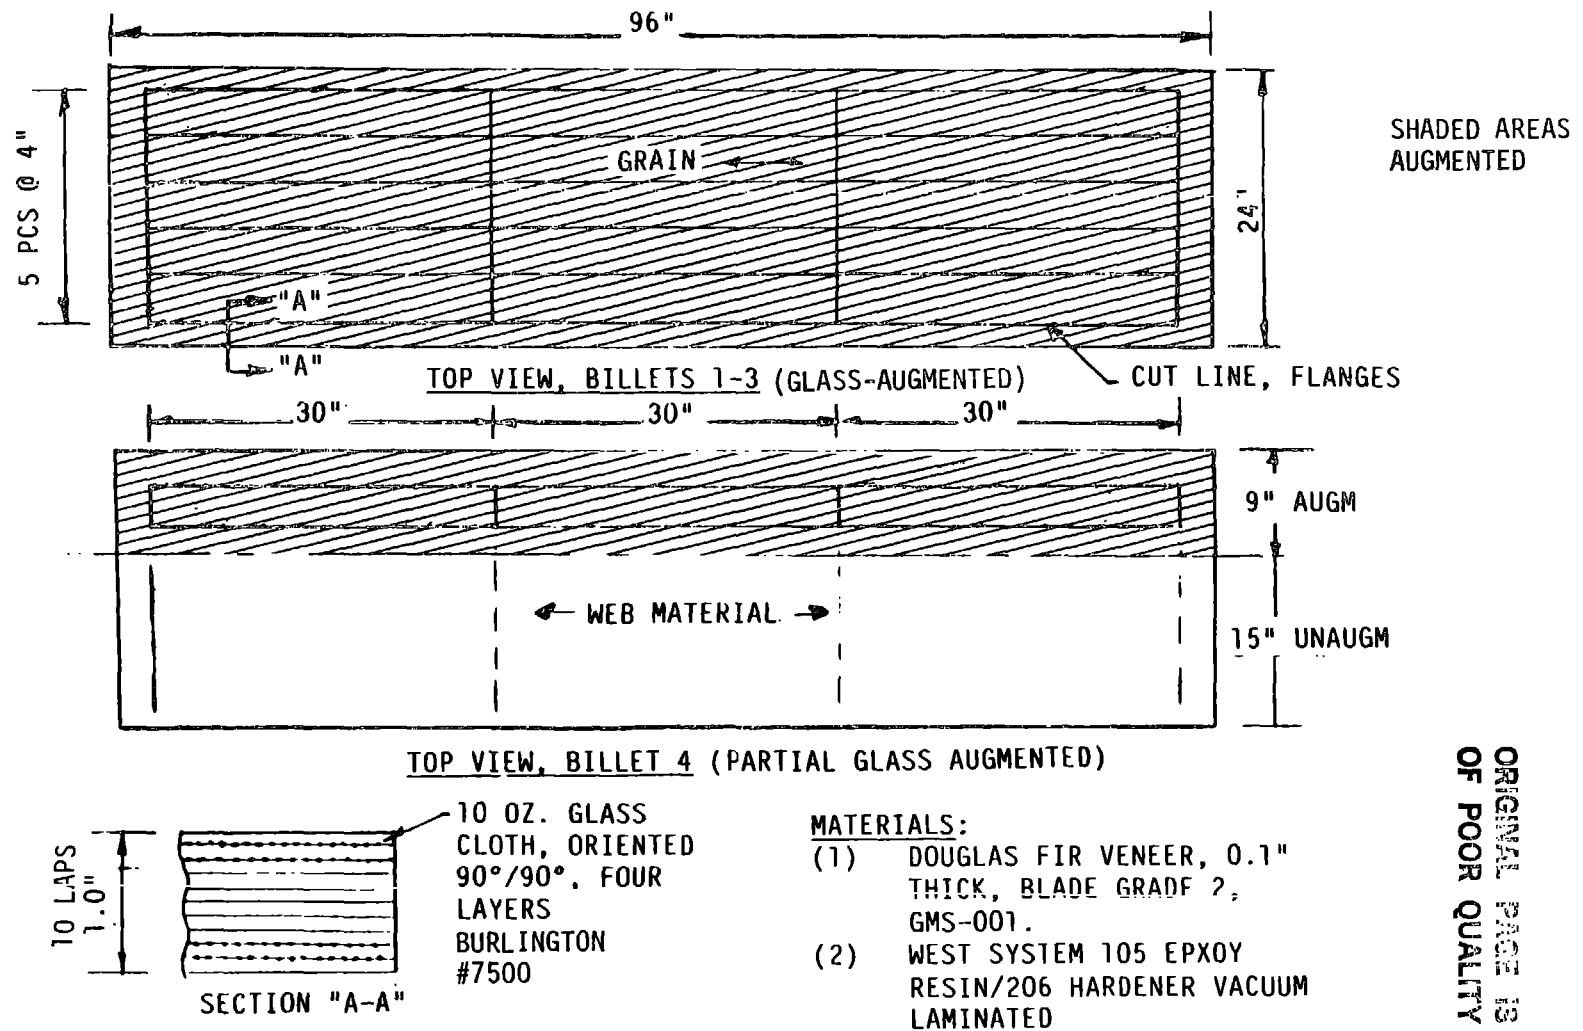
Billet Fabrication - Longitudinal Wedge Joint Test Specimens
